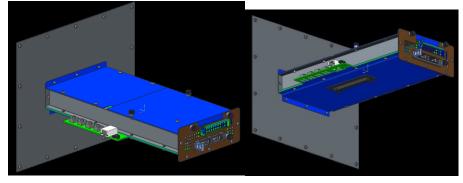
</u>113: SFF Thermal Test Fixture Preliminary Design – Cover Removed
